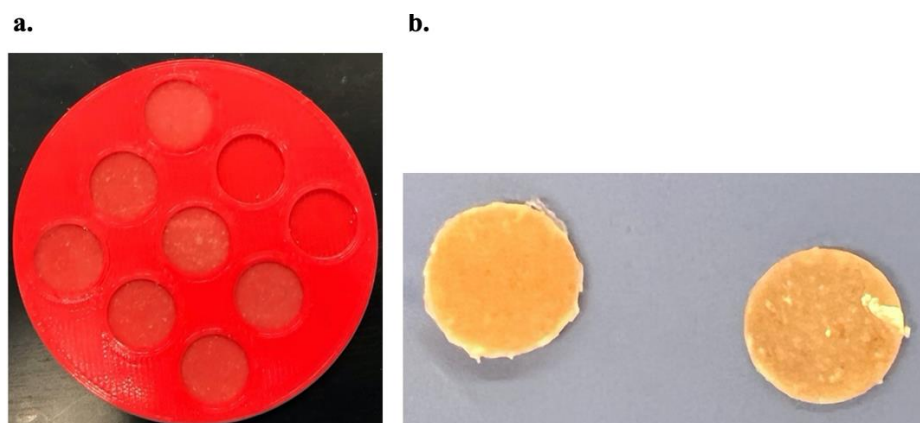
a. PDMS/BA-CD electrodes molded in 3D printed casting plates of 1 cm diameter and 1 mm thickness; b. cured electrode samples of 1 cm diameter and 1 mm thickness
